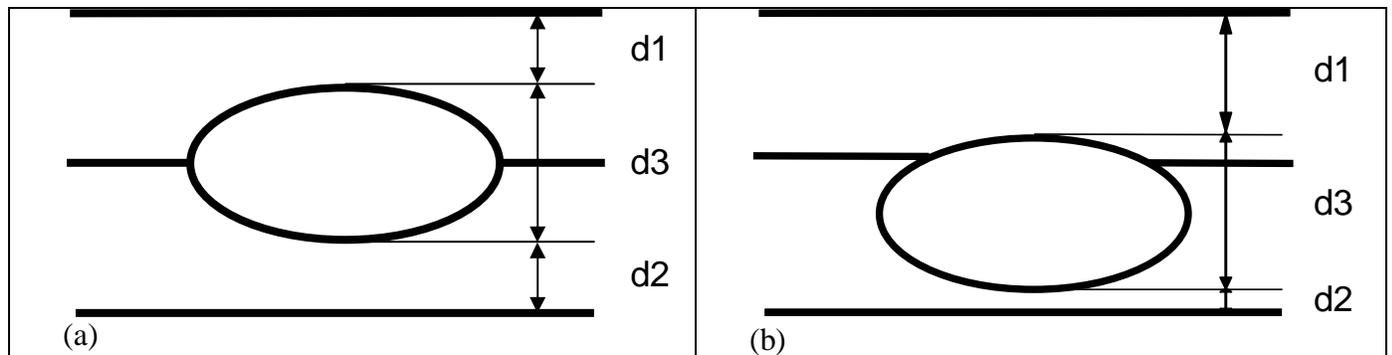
(a) – the symmetrical case of same-material, same-thickness weld; (b) – the non-symmetrical case, the nugget is shifted towards one of the welded plates making the joint weaker.
